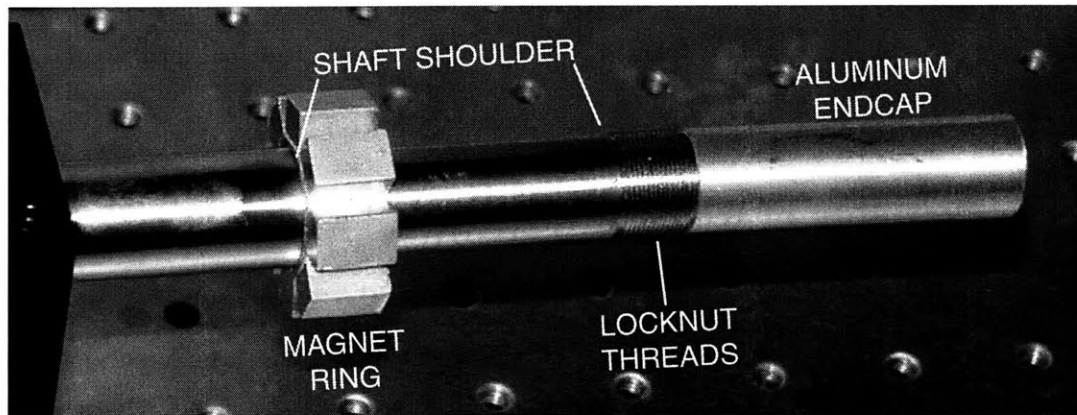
The first magnet ring has been slid onto the shaft's shoulder. The aluminum endcap centers the ring on the ferromagnetic shaft during assembly.
